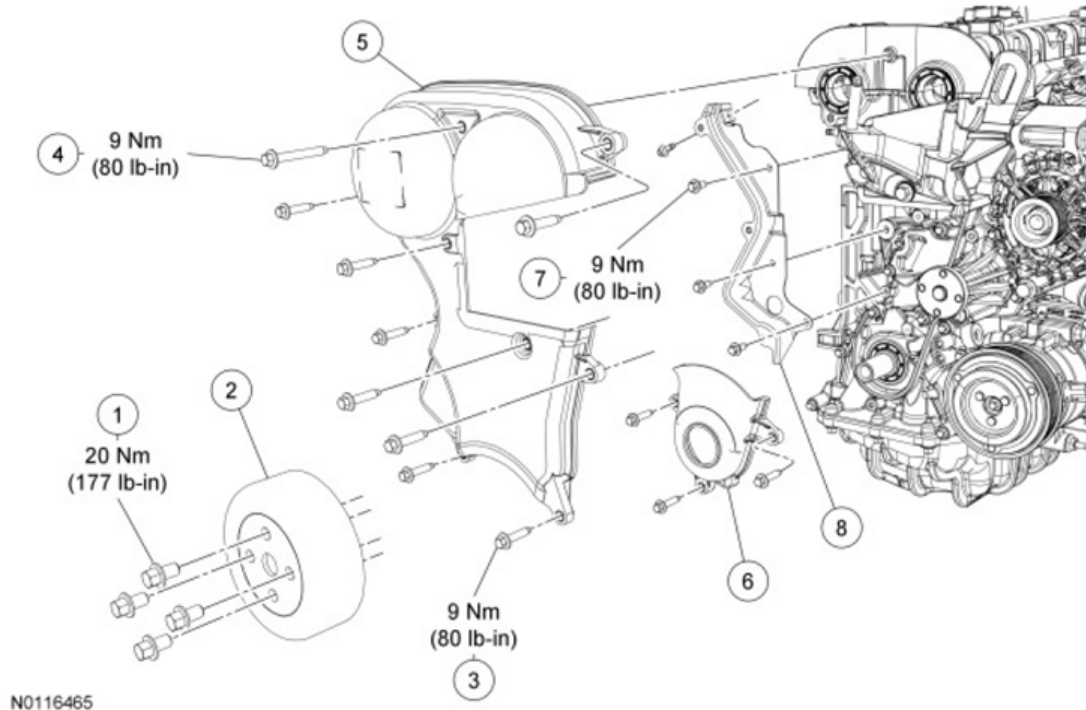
Identifying Timing Belt Cover Components With Torque Specifications
